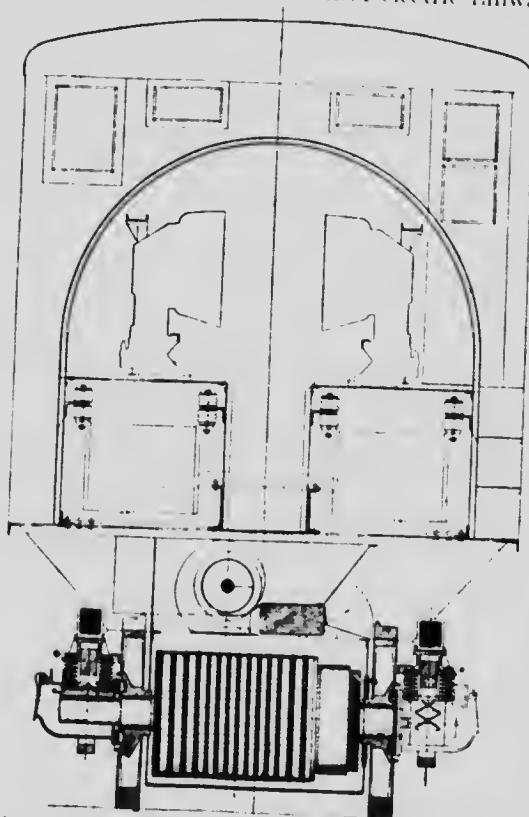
,914.—Cross section through Motor of Gearless Locomotive.
